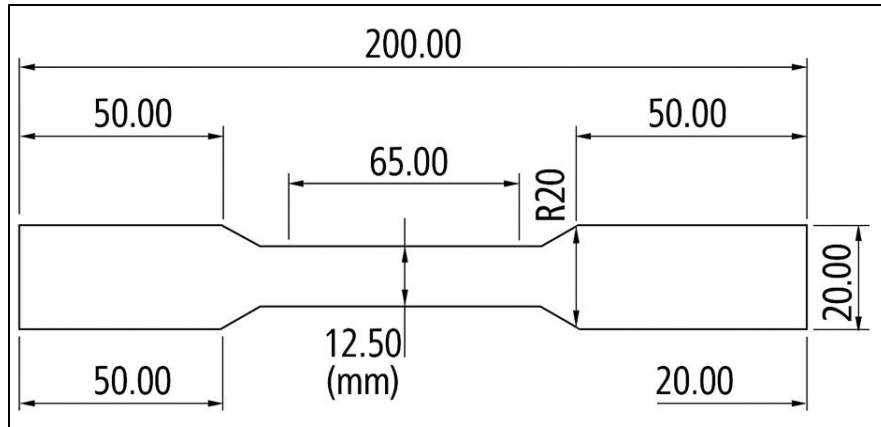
Dimensions of a typical dog-bone steel coupon specimen
